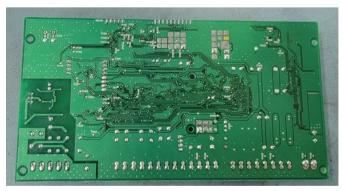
, 5.1.5 - MG5050+ PCB view
